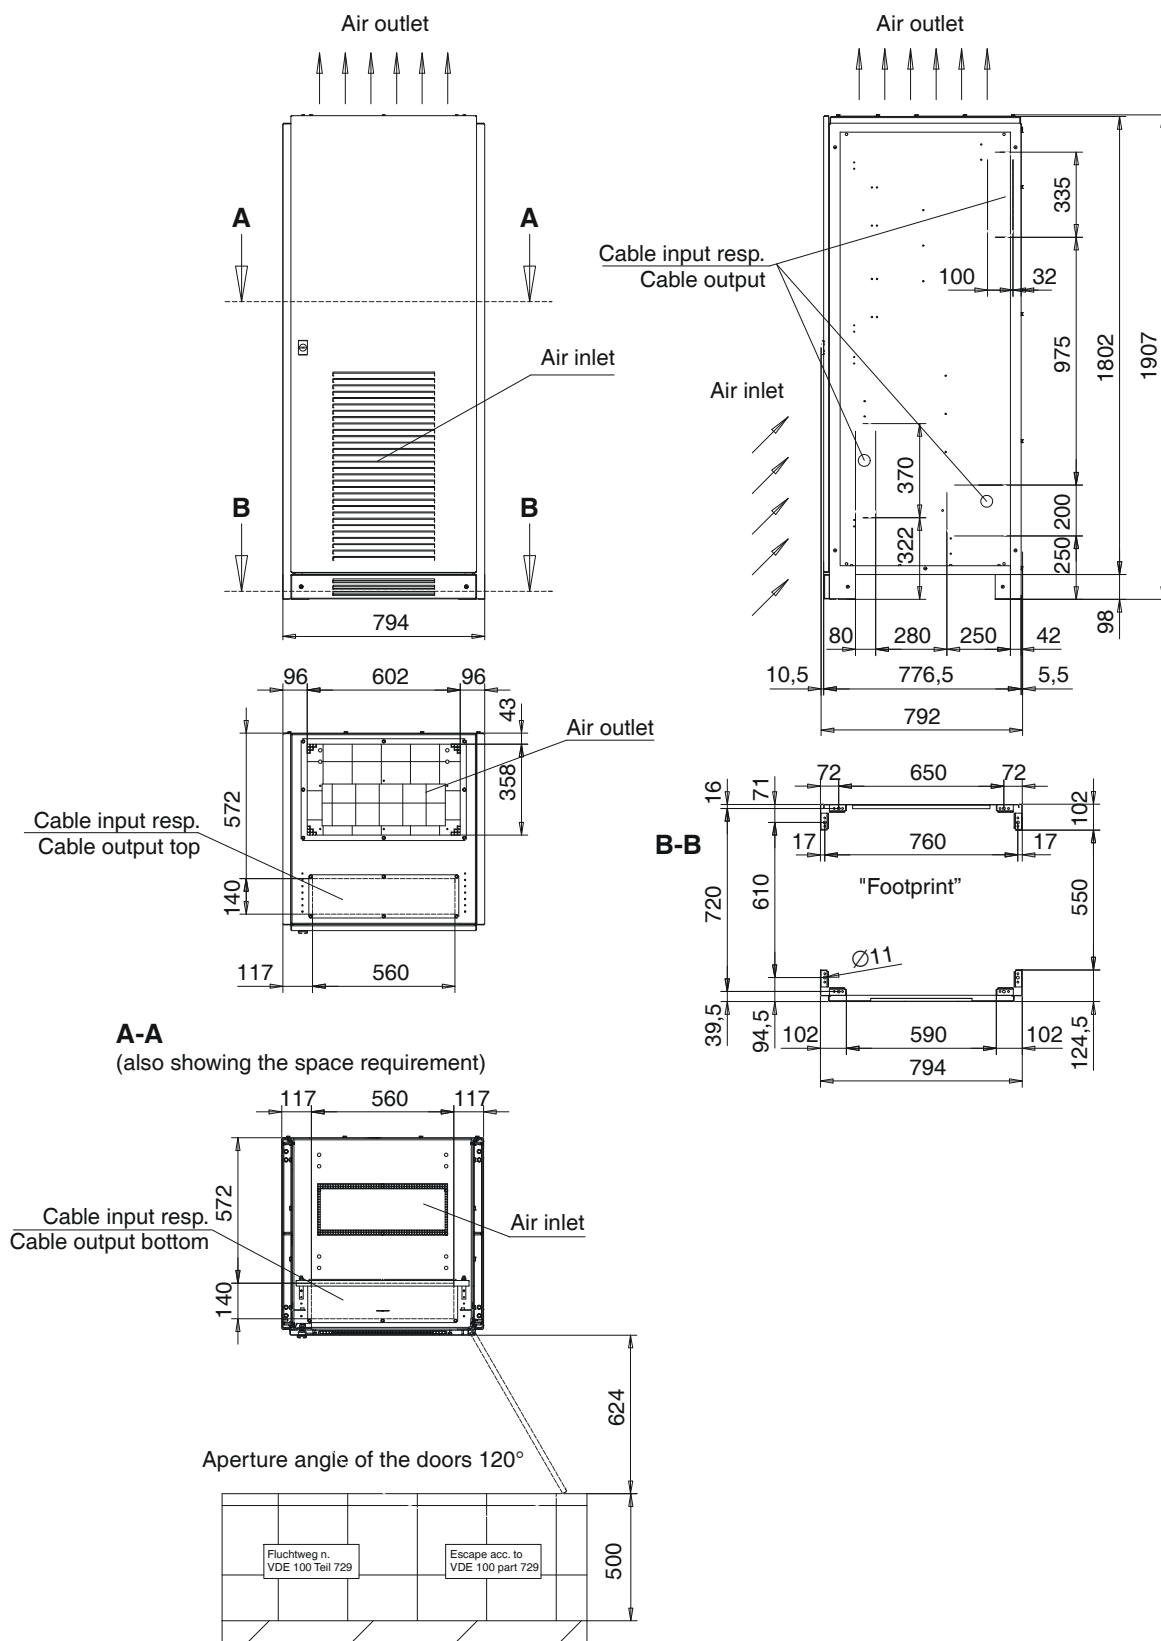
Auxiliary cabinet APOCONV 100-200 kVA dimensions and space requirements
